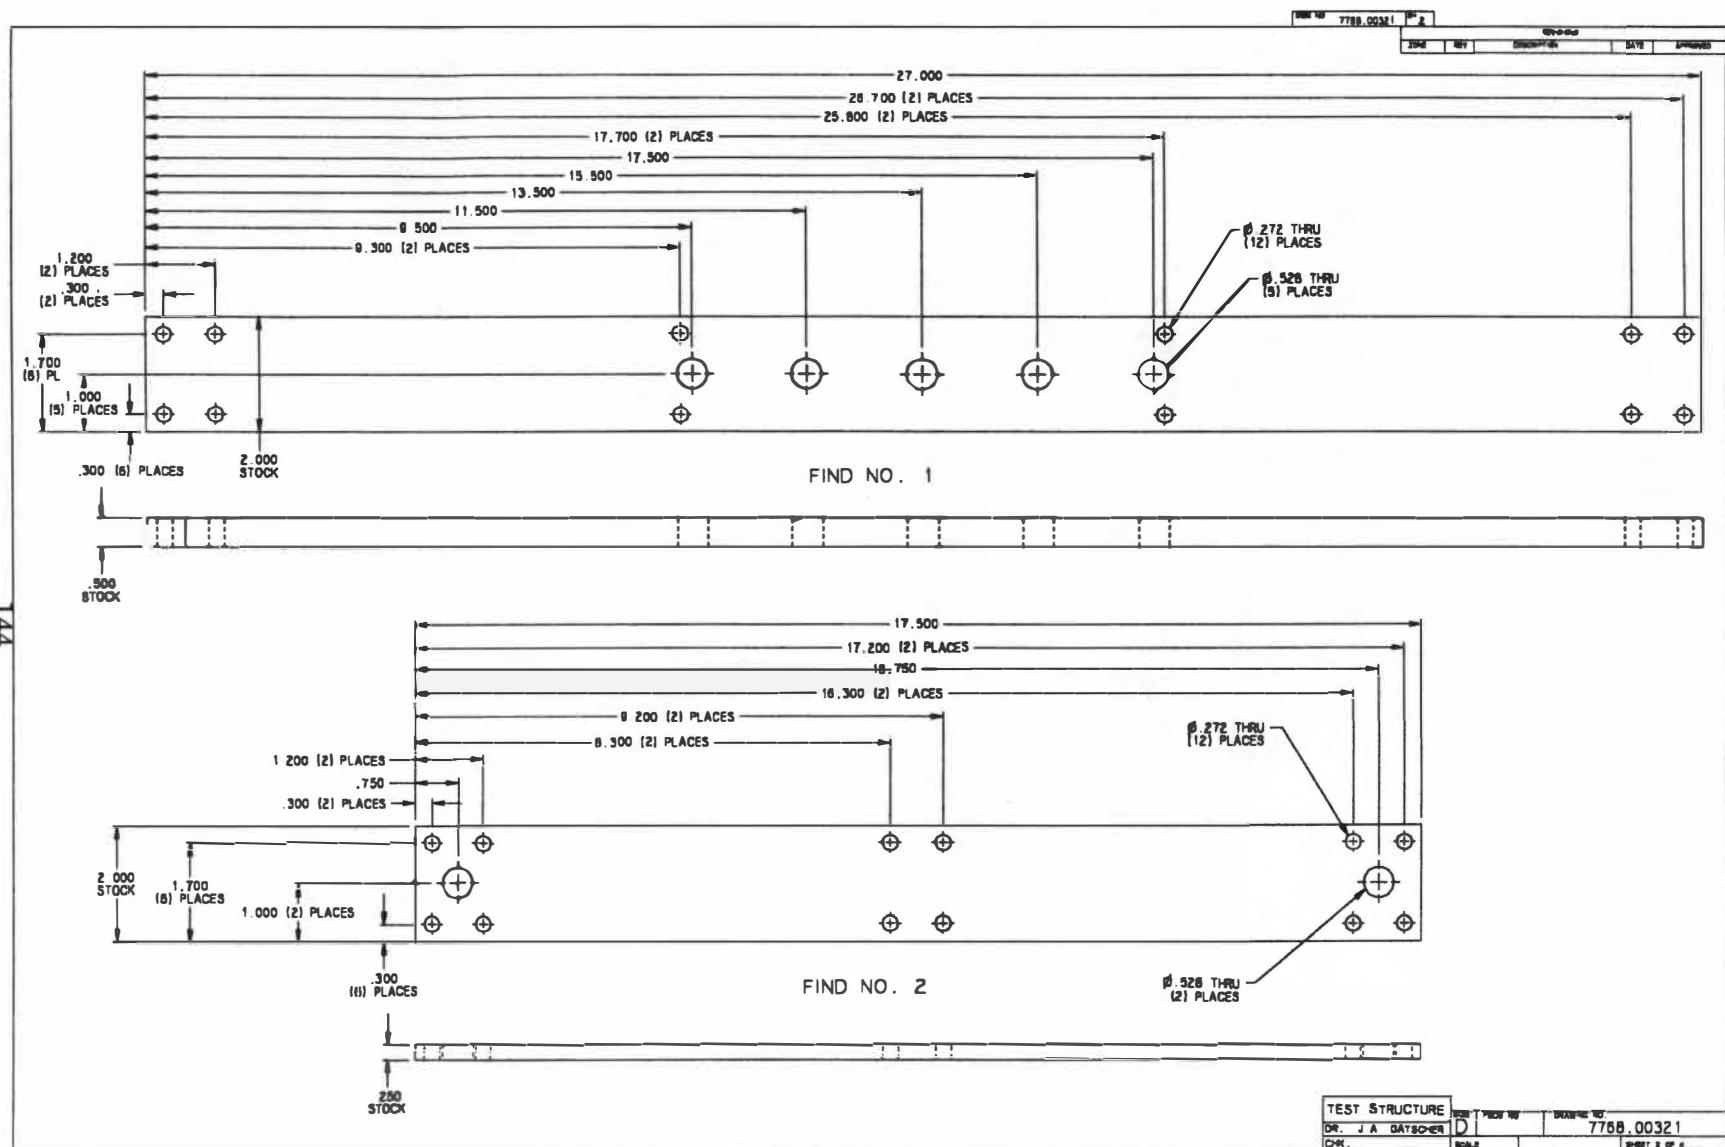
Fabrication drawing of beam and block test structure - sheet 2.
